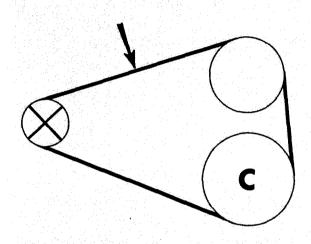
FIG. A ALTERNATOR DRIVE AND WATER PUMP DRIVE
